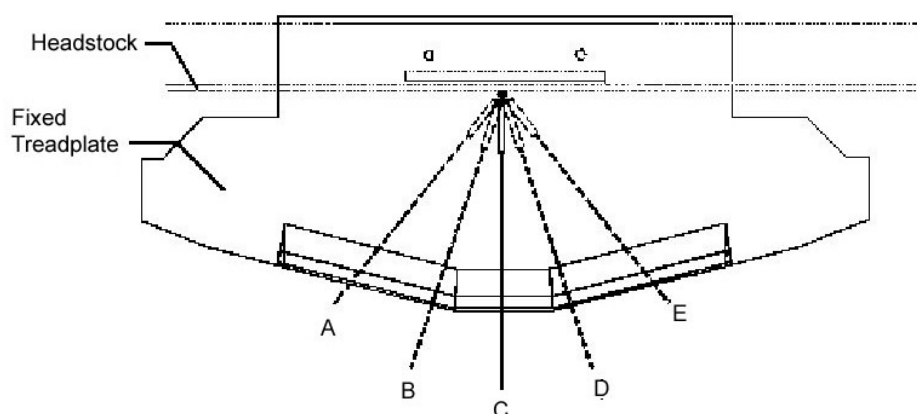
Plan View of Fixed Treadplate Showing Gauging Positions
